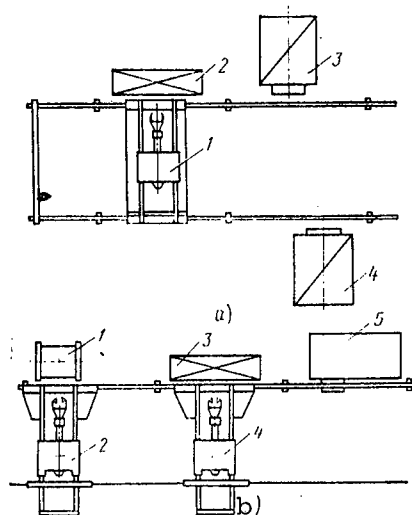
Layout of Sections: a--sheet-metal stamping (1--MP-100 manipulator; 2--press with force of 3.15 MN; 3, 4--heating furnaces); b--hot stamping (1--cutoff press; 2, 4--MSH-025 manipulators; 3--swage hammer with maximum force of 16 t; 5--semi-holding furnace)
